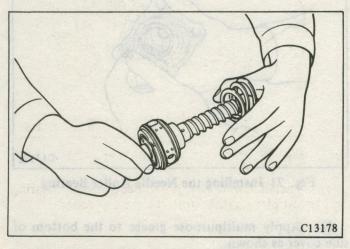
Installing the Thrust Plate and Thrust Needle Bearing
